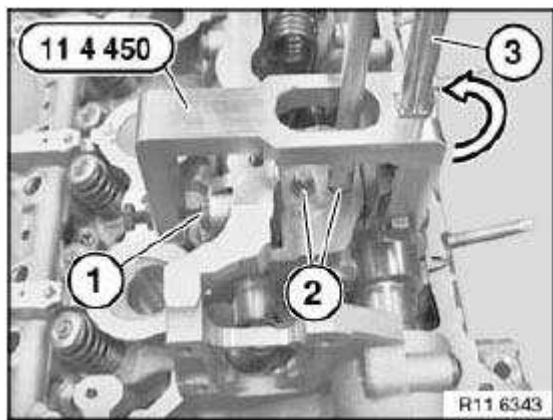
Turning Eccentric Lever On Special Tool (11 4 450)
